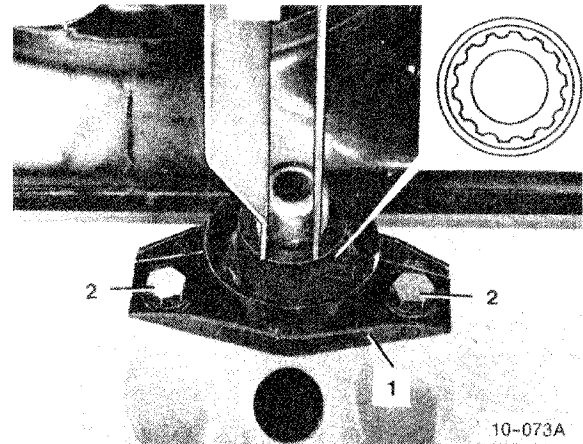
Front engine mount being aligned. Move housing (1) on bolts (2) until rubber core is centered (inset).
